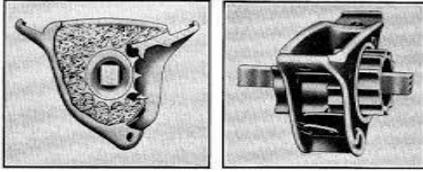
Fluted-wheel type of seed-metering device. (Deere & Co.)
